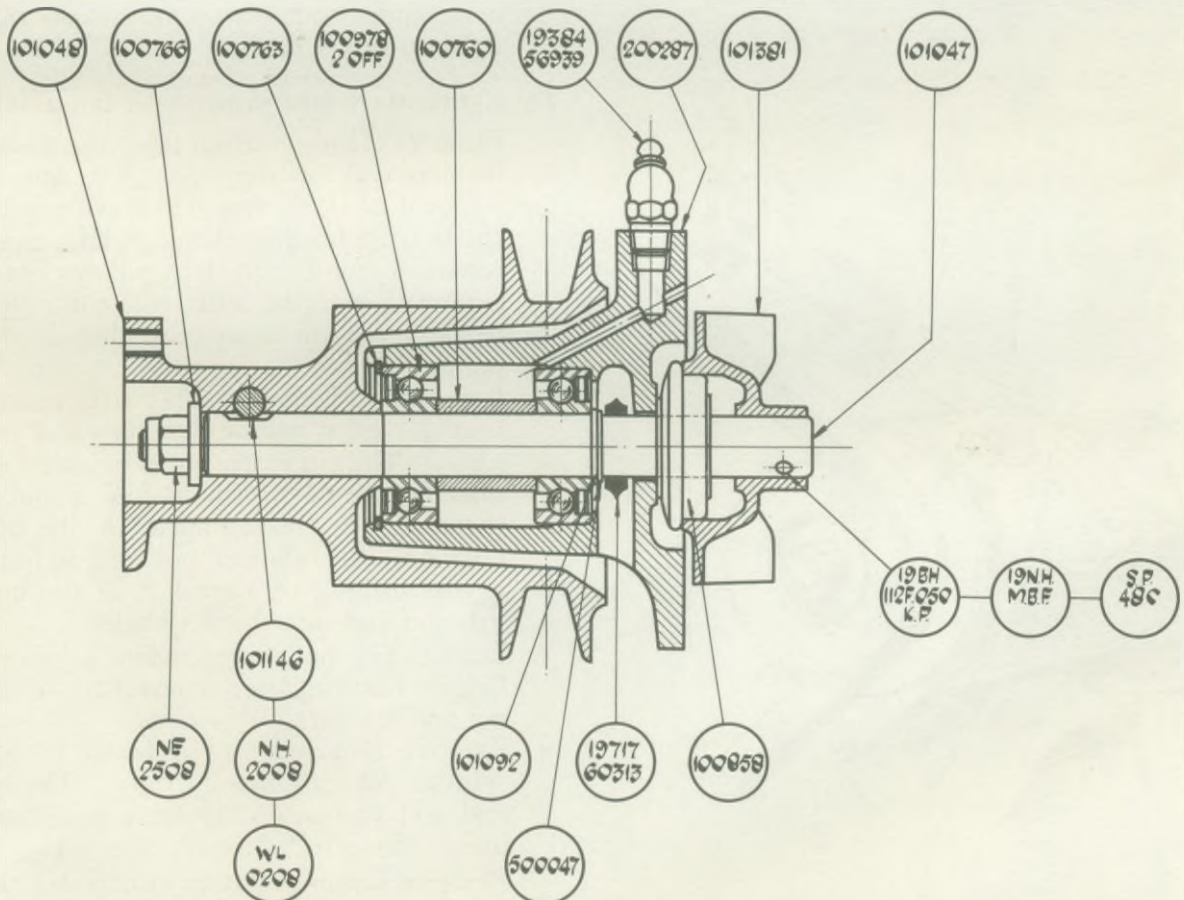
Fan and Water Pump Bearing Housing Assembly. Detail No. 101049—The assembly, as shown, was introduced at Eng. No. V.46611E, but used from V.42140E and V.46610E with the Seal and Impeller fitted to Water Pump 58910.
